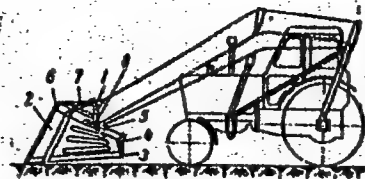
1- extension frame; 2- scoop; 3- unloading opening;
